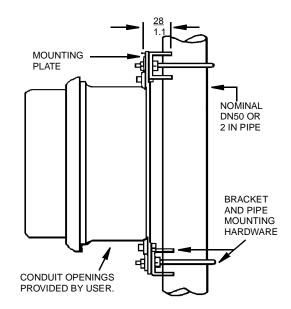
Field Mounting (NEMA 4X) Pipe Mounting Detail
